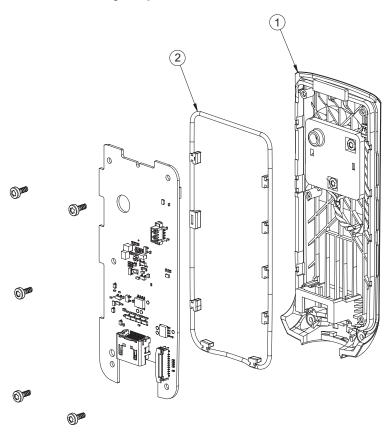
Control Head Assembly Exploded View for HCH Back Housing for 0104063J17
